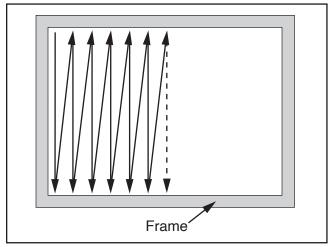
Example of frame around workpiece and basic back-and-forth tracking pattern.
